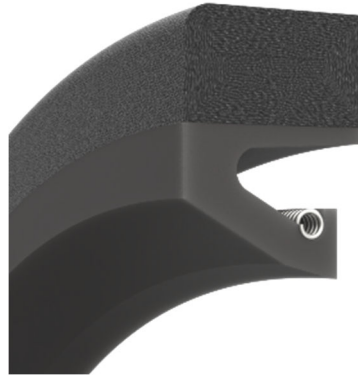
RWDR with a garter-spring on a main bearing (Ref.: CARCO GmbH)
